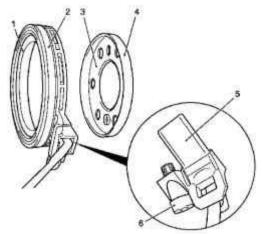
Scheme to connect the sensor and encoder to the rear crankshaft oil seals: 1 - sealing edge of the flange of the crankshaft, 2 - outer surface of the sealing flange of the crankshaft 3 - encoder, 4 - Runner encoder 5 - crankshaft sensor, 6 - bolt mount crankshaft sensor
